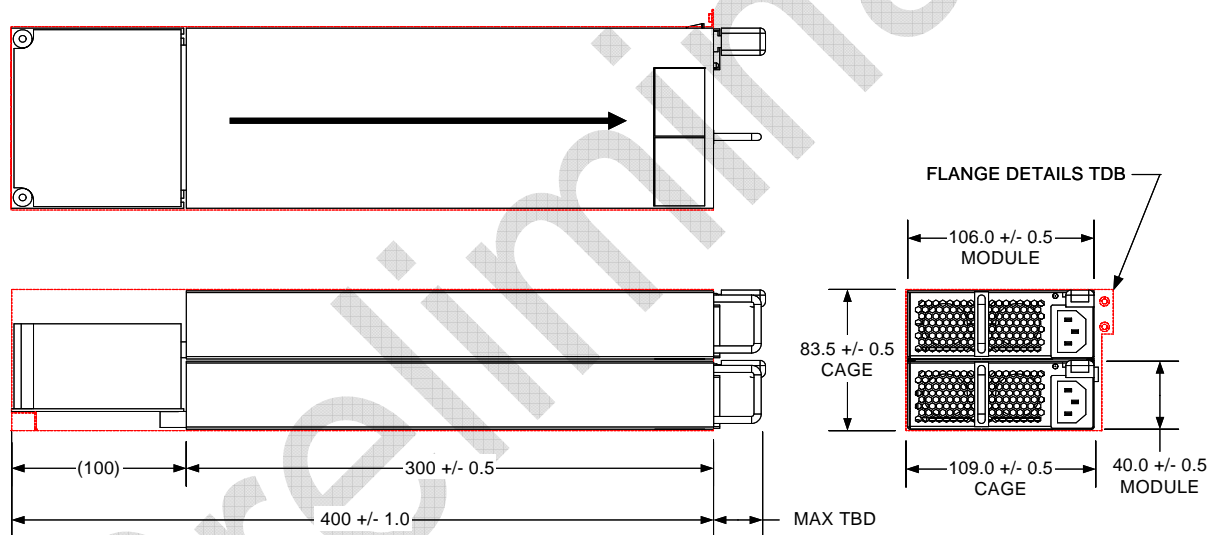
Mechanical Drawing for Dual (1+1 configuration) Power Supply Enclosure with PDM
